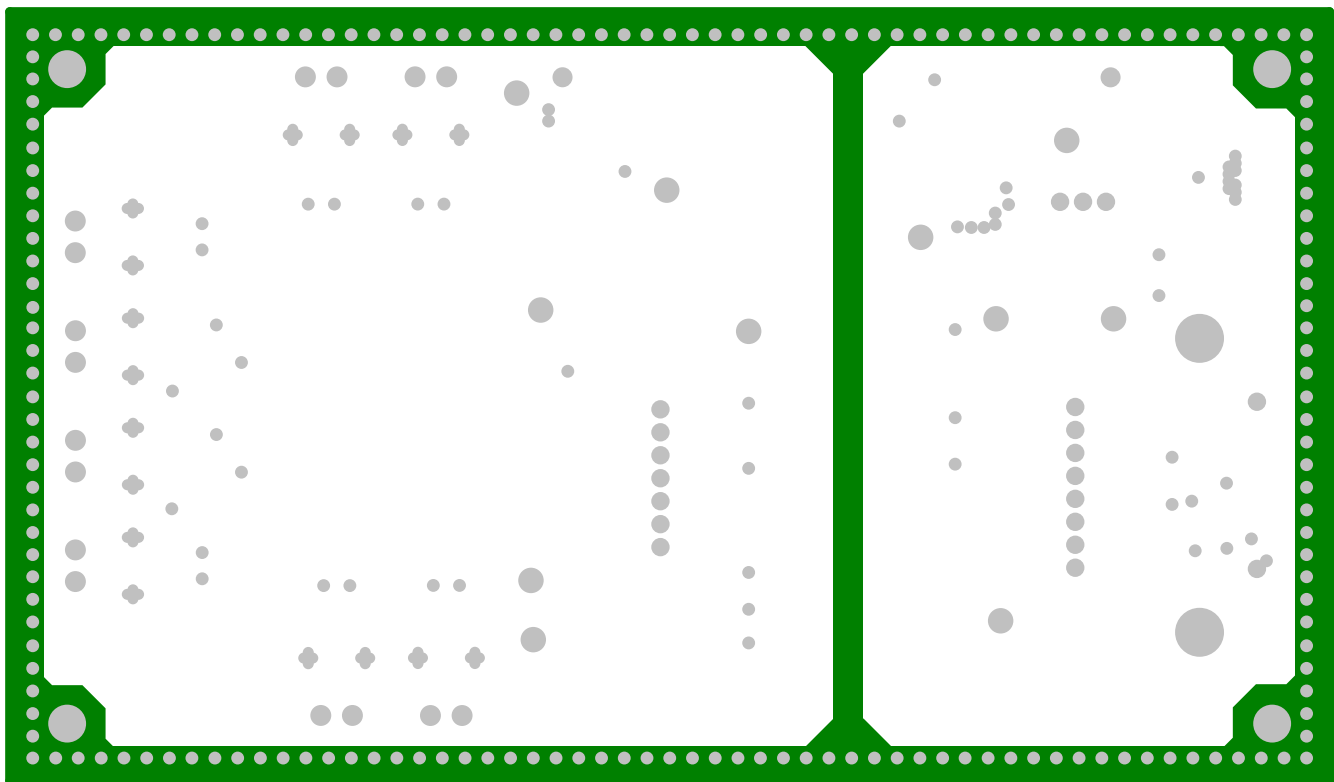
ADS125H18 EMC Test Board Inner Ground Layer 1
